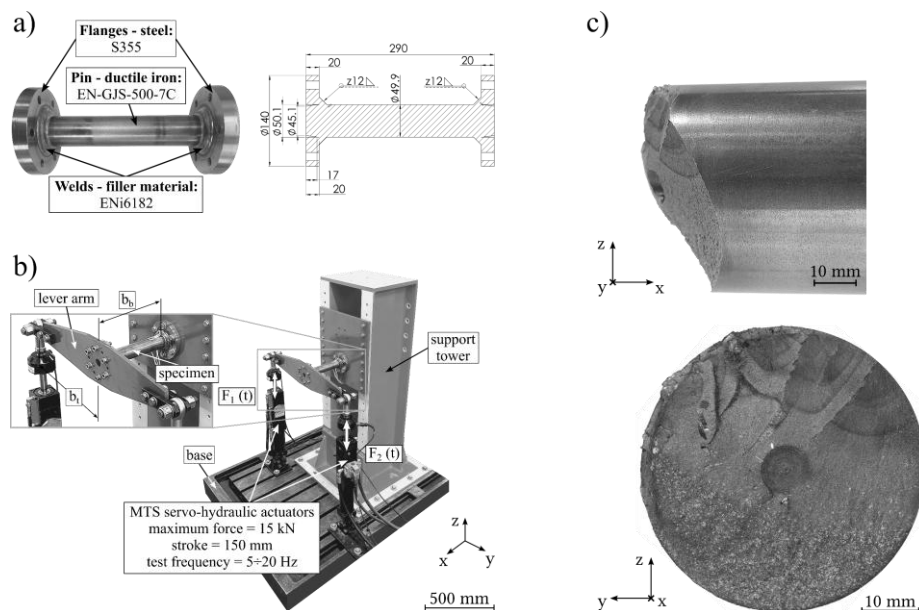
Pin-to-flange specimen geometry (a), setup of the test bench (b) example of bending-torsion fracture surface (c).
